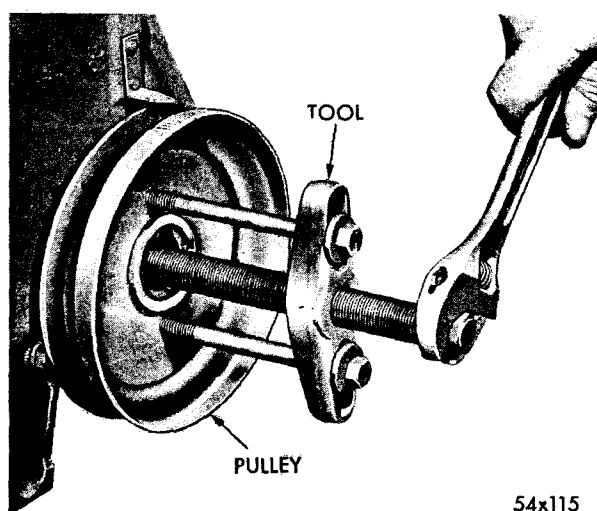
Removing Crankshaft Pulley with Tool C-3033
